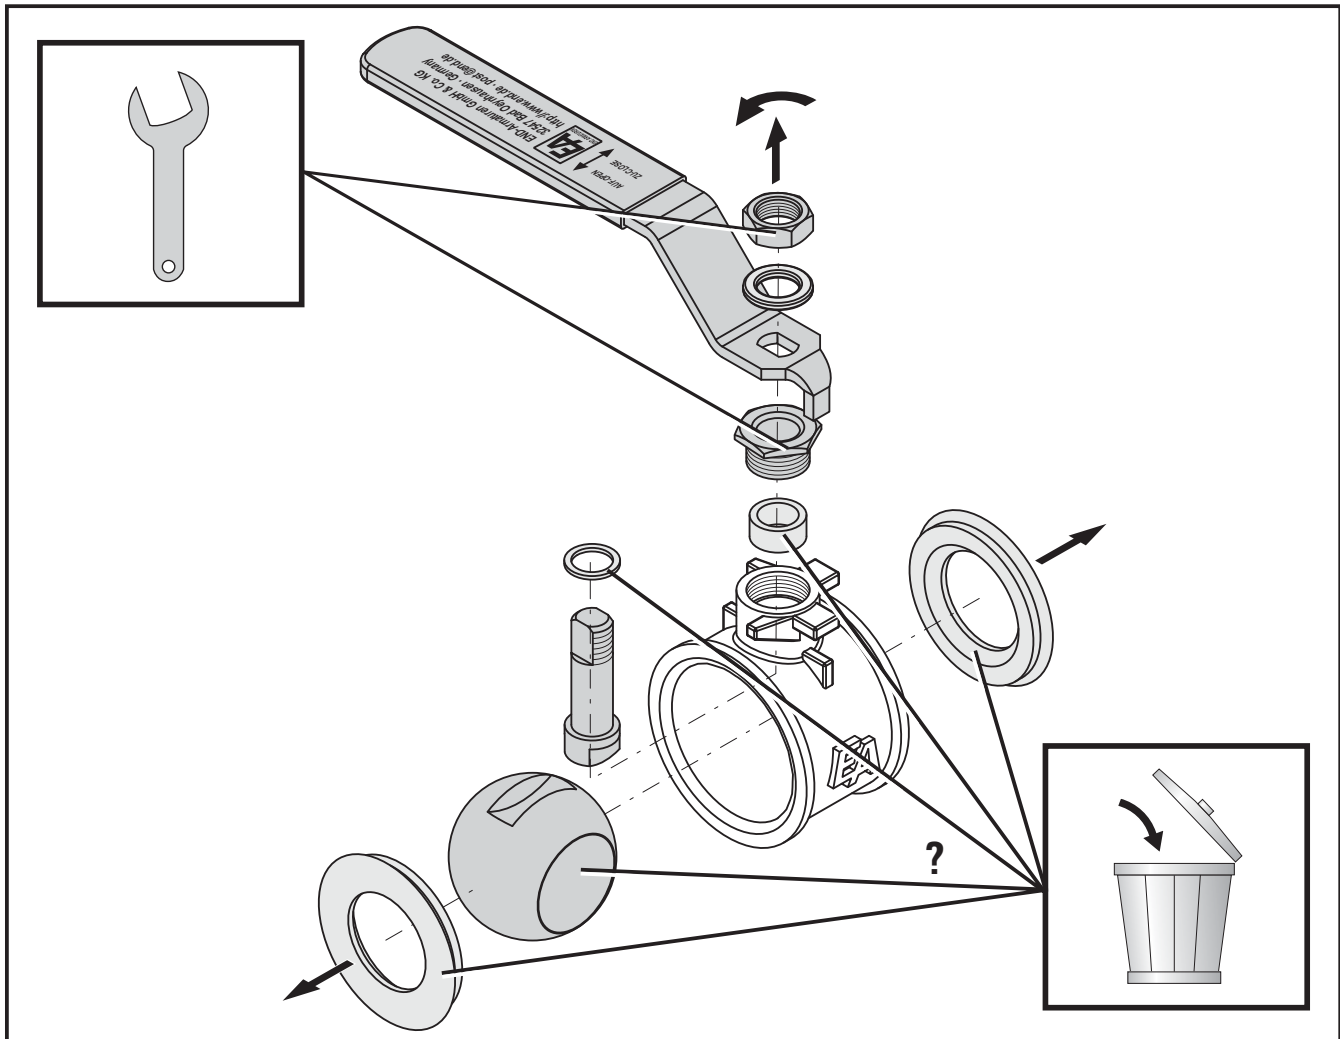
ball valves, replacement of the sealing kit: removement of the inner parts (Fig.: Art. ZE311064)
